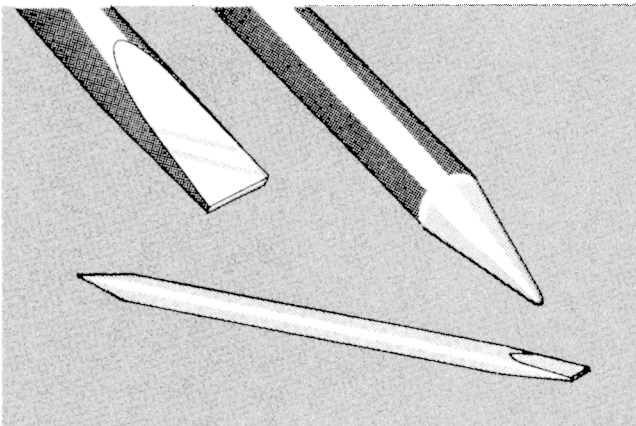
A soldering aid constructed from a 1/4 inch wooden dowel.
